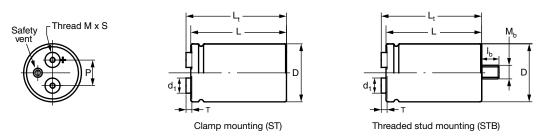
B - High current M6-18 mm disc and 1/4-28 UNF disc: Screw Terminal (ST) and Screw Terminal Bolt nut (STB) For details refer to Table 1
